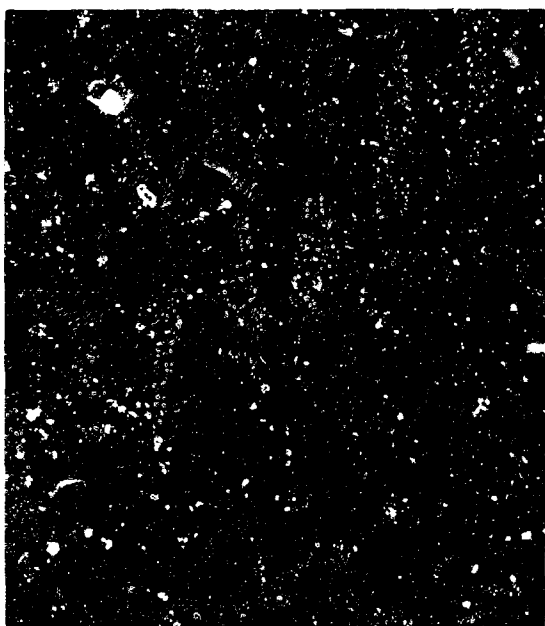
Fractograph Showing Quasi-Cleavage Fracture Mechanism
